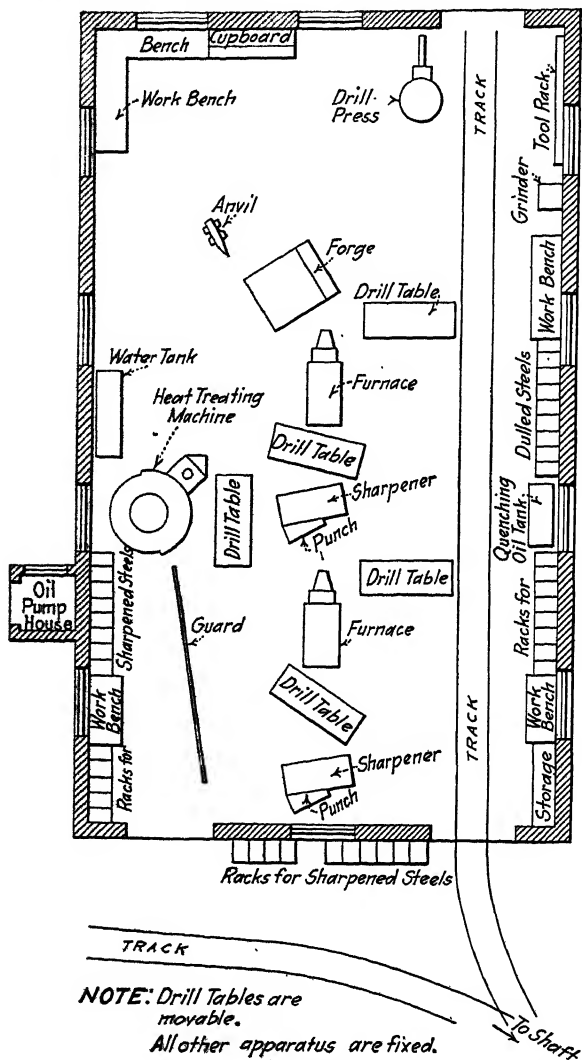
SHOP, 51 BY 30 FT. INSIDE; BRICK CONSTRUCTION.
